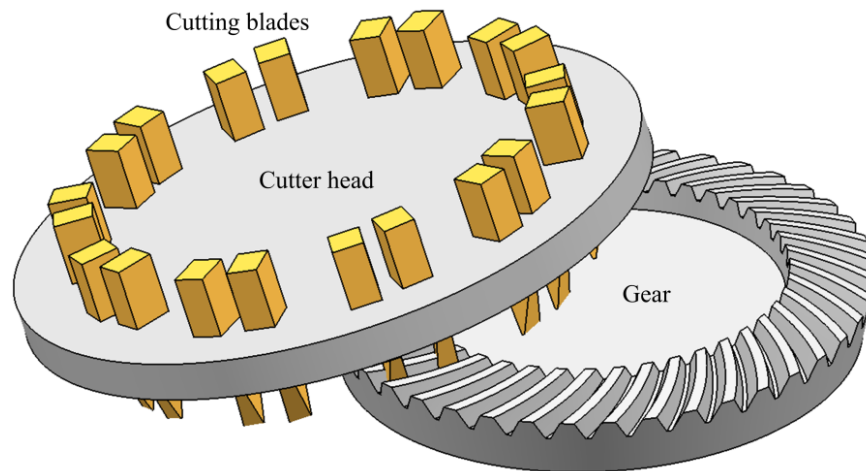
Cutter and the gear blank engagement in the non-generated machining process.
